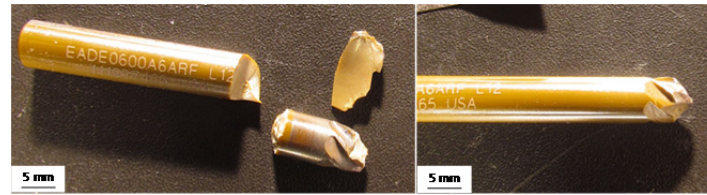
Failure of cutting edges (left) and tool stem (right)
